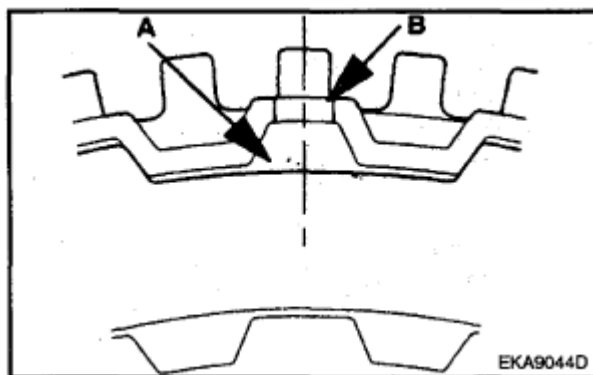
Locating Driven Gear, Shaft And Sprag Spring
